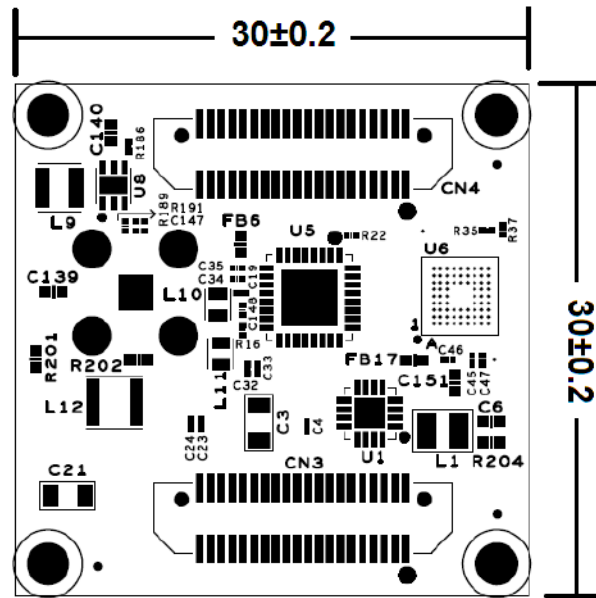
NileCAM21\_CUXVR Serializer Board Front View
